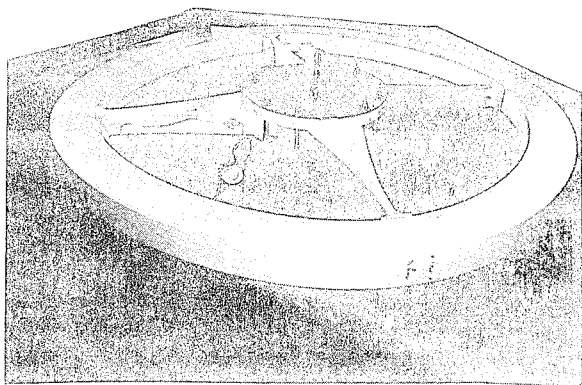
U.S.A. MERADCOM Flywheel Test Rotor
